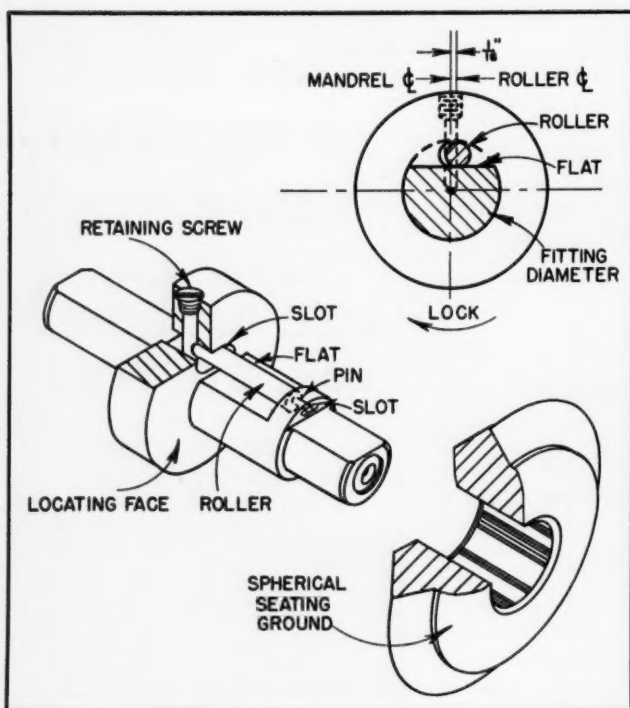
As shown in this sketch, the mandrel used for mounting the pinion between the grinder centers has a large diameter locating face in the approximate center of its length.
